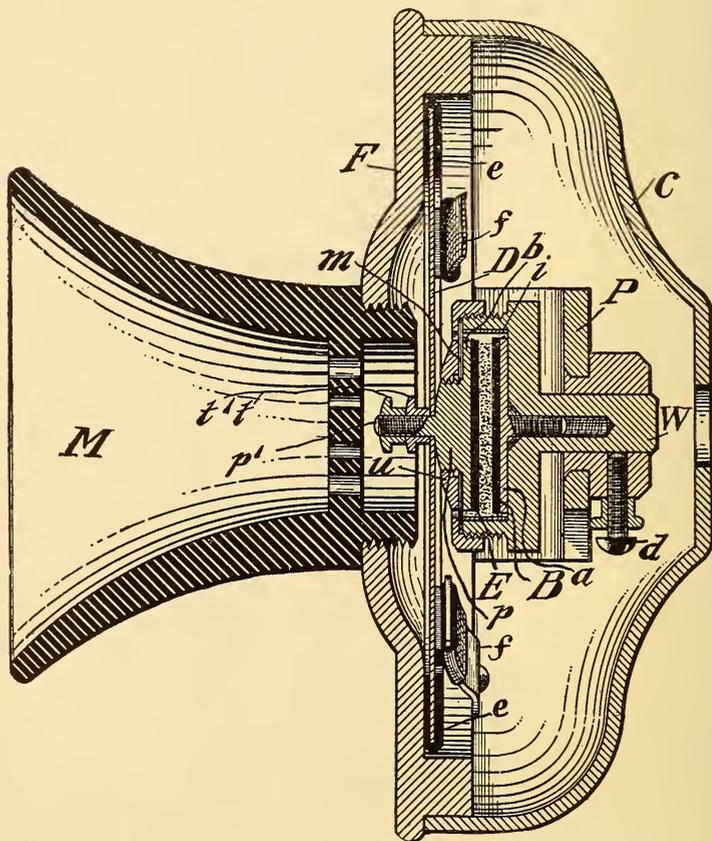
SECTIONAL VIEW OF SOLID-BACK TRANSMITTER.
